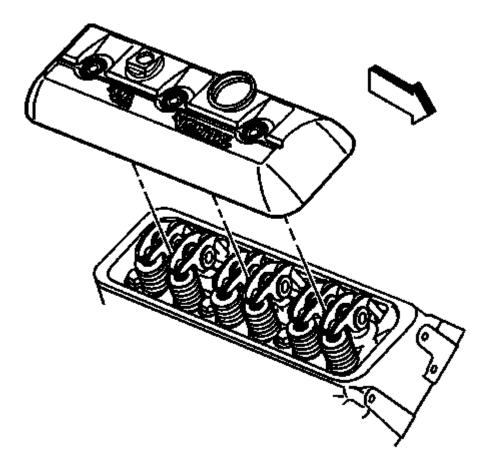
Valve Rocker Arm Cover (Right) Courtesy of GENERAL MOTORS CORP.
